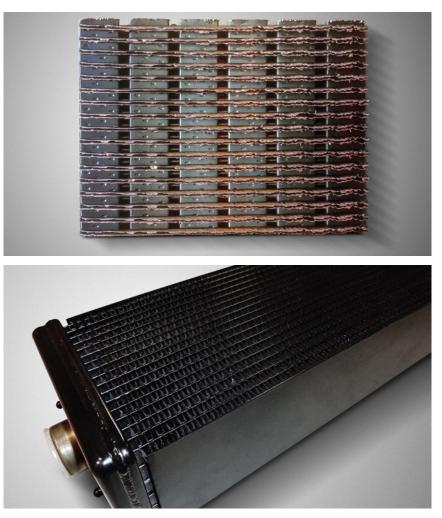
Coated mid-size radiator with six tube rows. The black appearance of the tubes on the cross section in the right demonstrates the complete penetration of the coating through the core.
